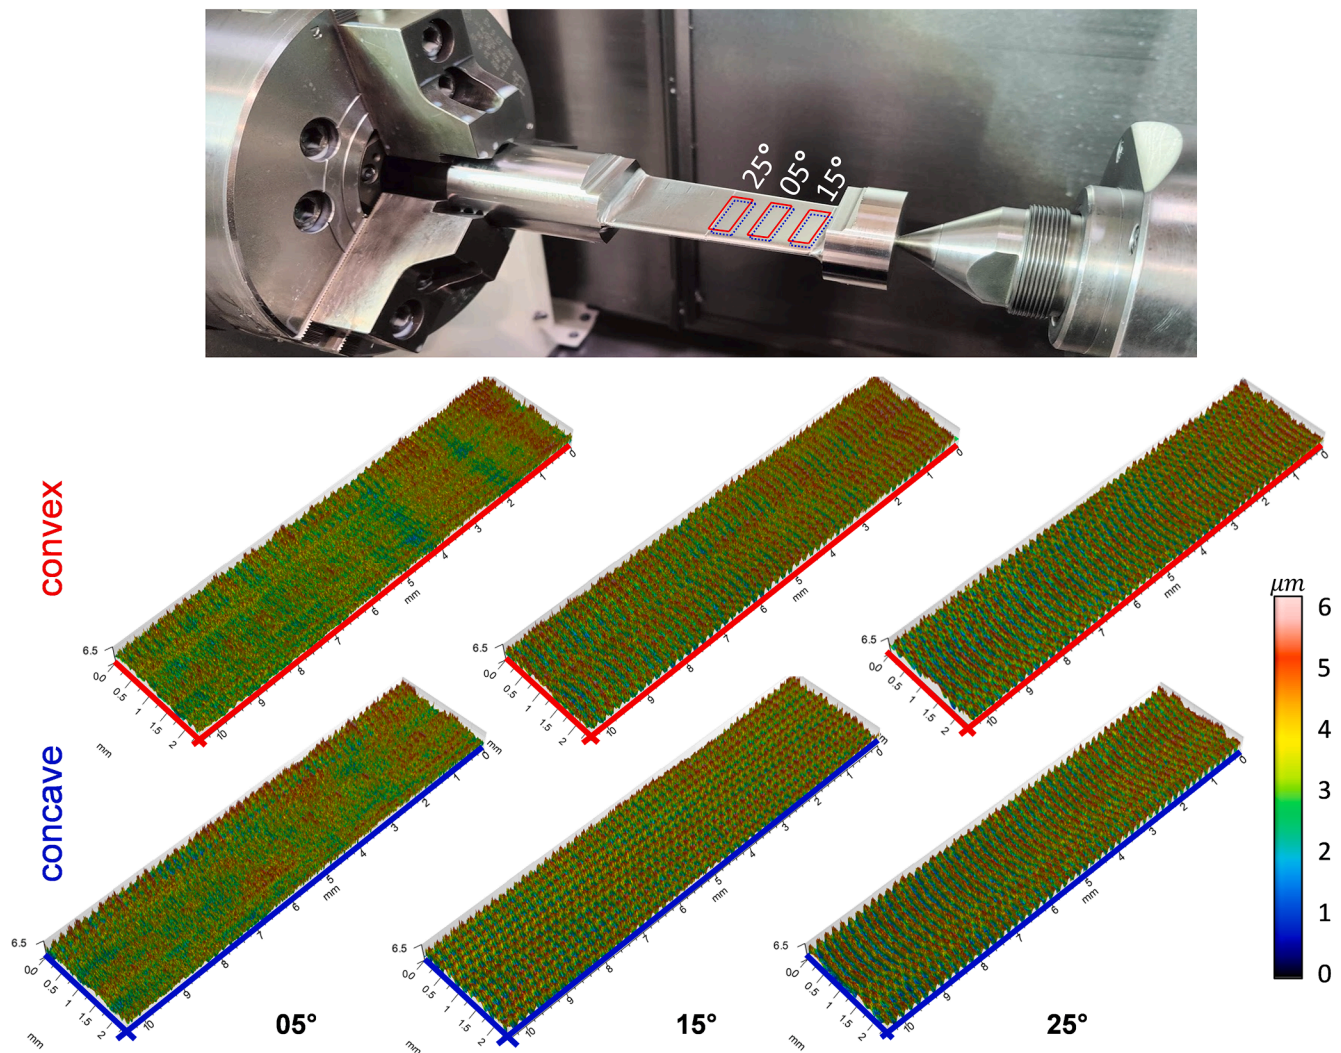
Machined blade and topography inspection of the central region.
